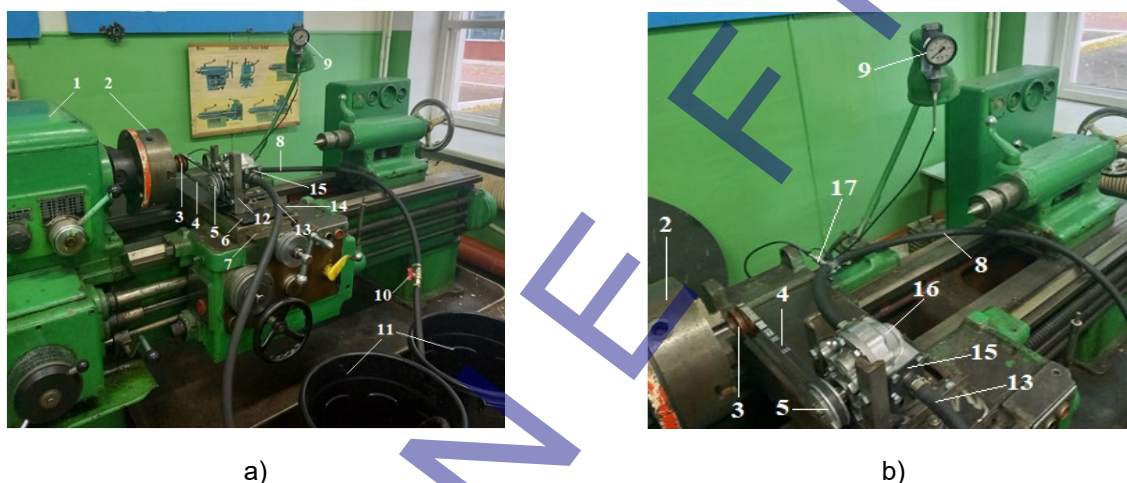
Mounted device for testing gear pumps based on a lathe: a) front view; b) top view; 1 – lathe; 2 – three-jaw chuck; 3 – driving pulley; 4 – V-belt; 5 – driven pulley; 6 – plate; 7 – carriage; 8 – hose; 9 – pressure gauge; 10 – valve (shut-off cock); 11 – tanks; 12 – bracket; 13 – hose; 14 – bolts; 15 – flange; 16 – gear pump with a biaxial connection
